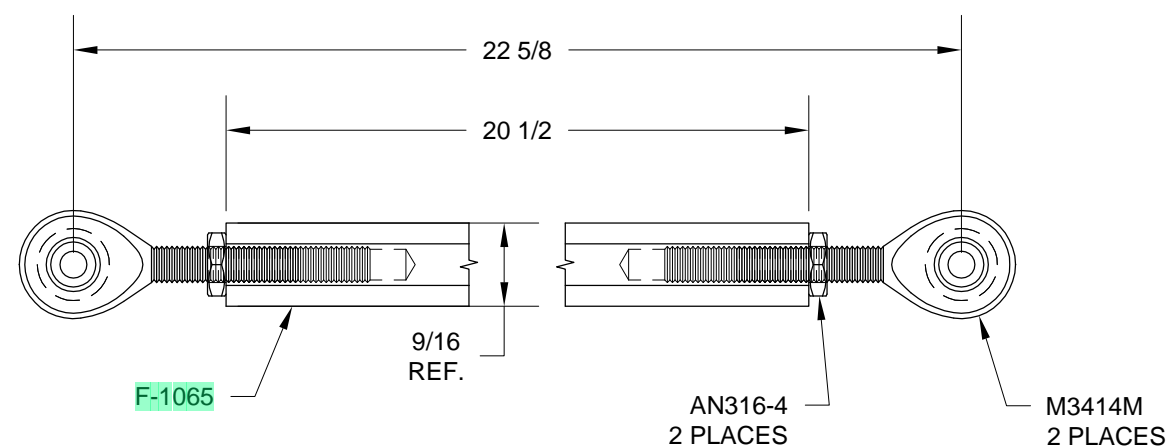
ASSEMBLING THE F-1065 PUSHROD
